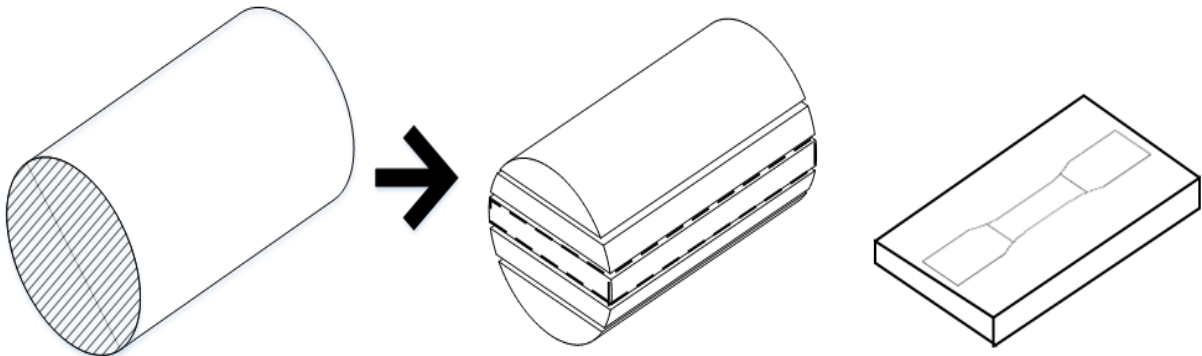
The extruded titanium profile is cut in nine plates. Tensile samples machined out of the plates from extruded samples.
